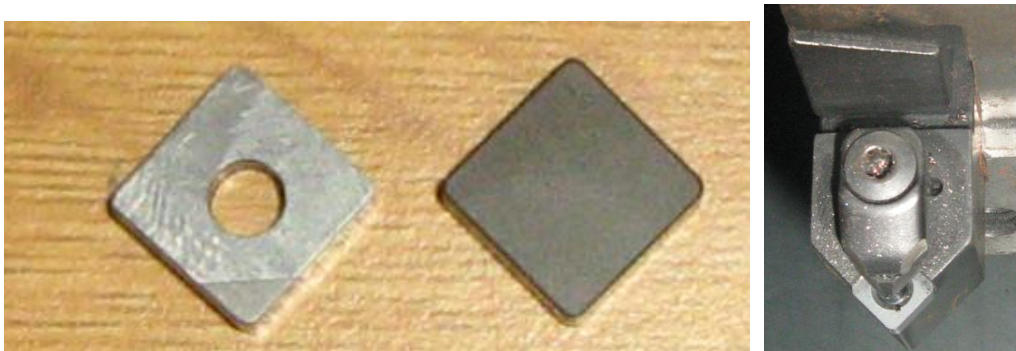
Photographs of cutting tool inserts produced for this project, left: the DBC 50 cutting tool and right: the B_6O cutting tool. Alongside right is the corresponding tool holder shown secured within the turret of the lathe.
